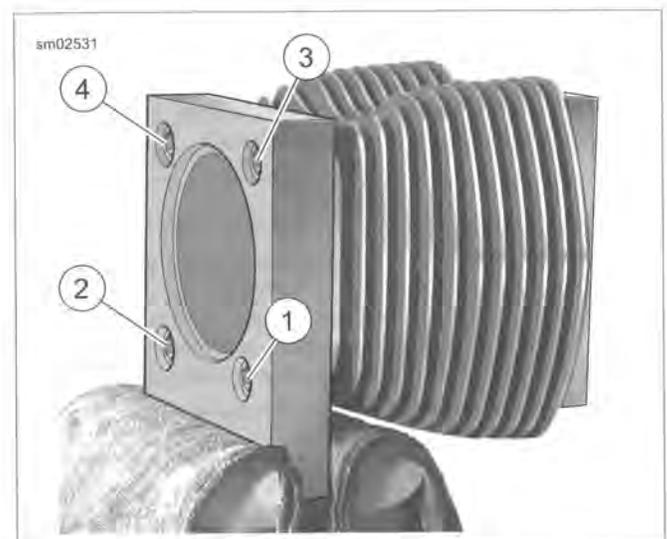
Cylinder Torque Plate Bolt Sequence
